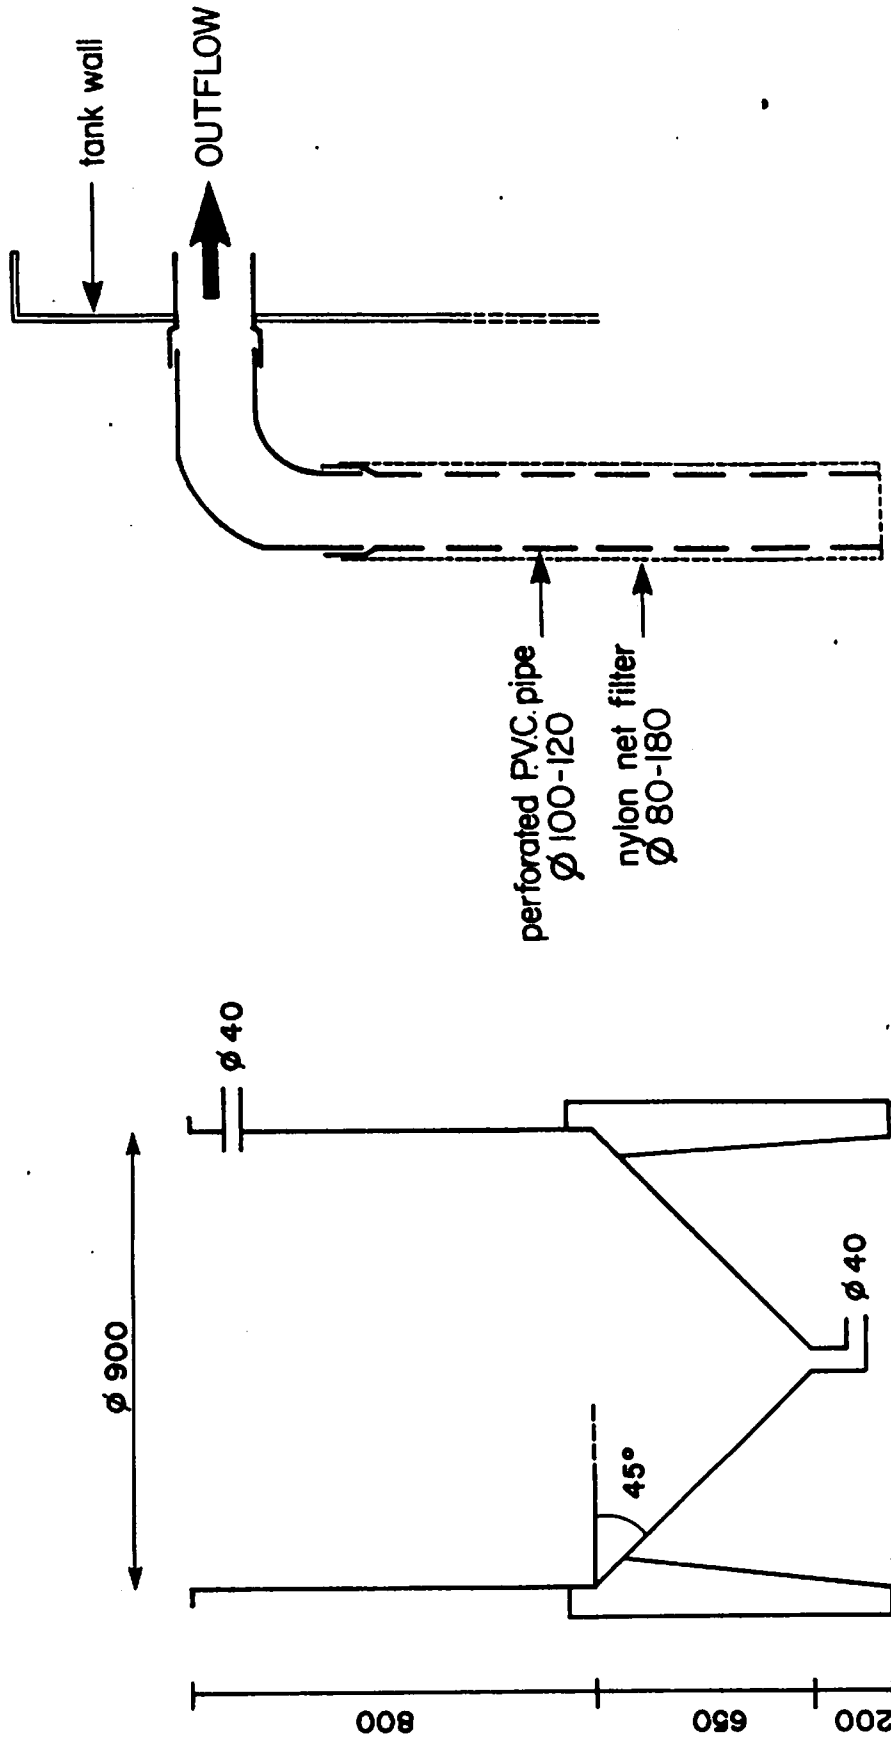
0.5-m³ cylindro-conical tank (3 supporting legs); units are mm.
